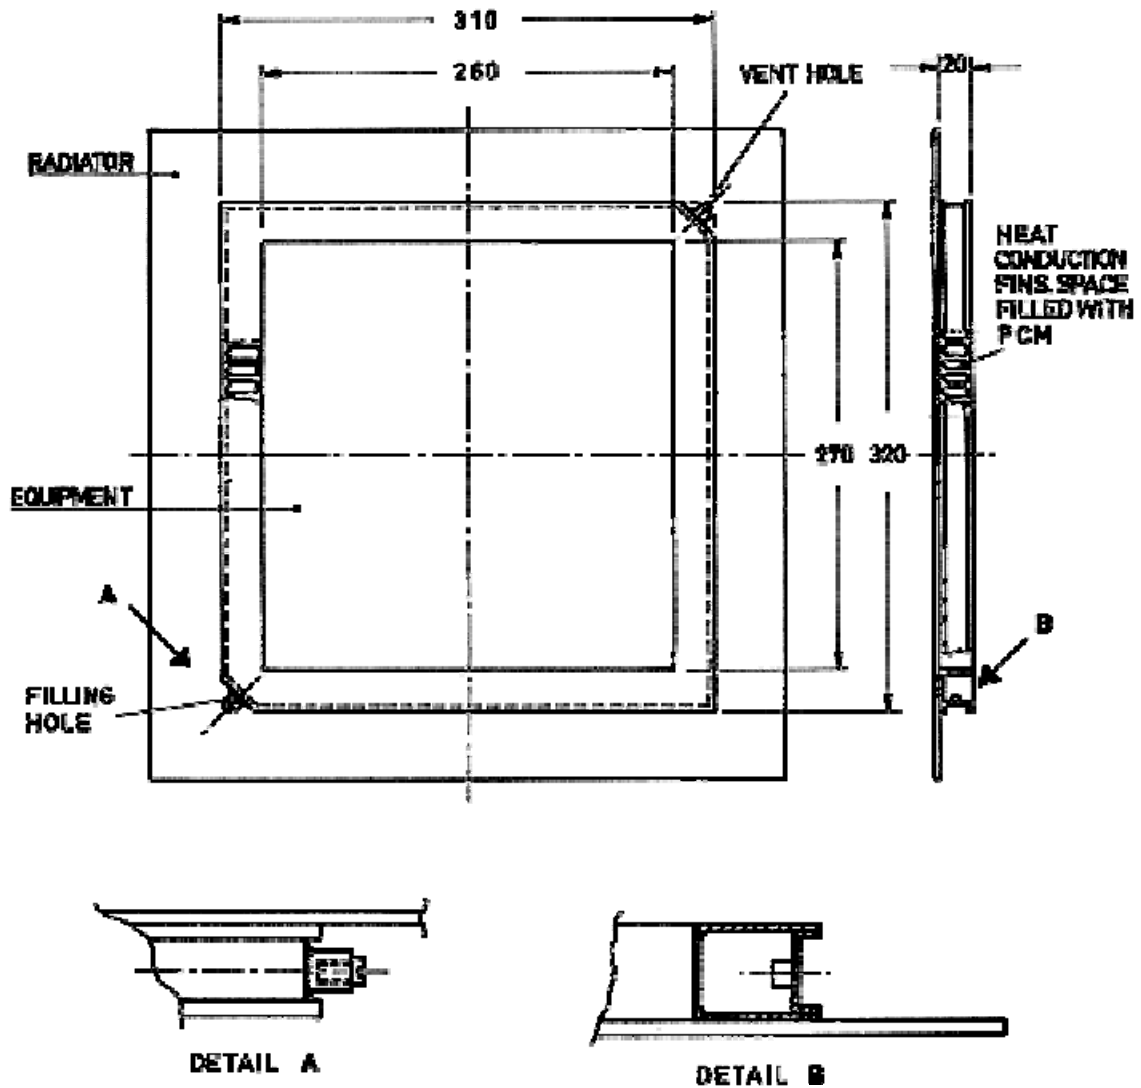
Container with machined wall profile and welded top and bottom. Honeycomb filler with heat conduction fins. All the dimensions are in mm. From DORNIER SYSTEM (1972) [10].
